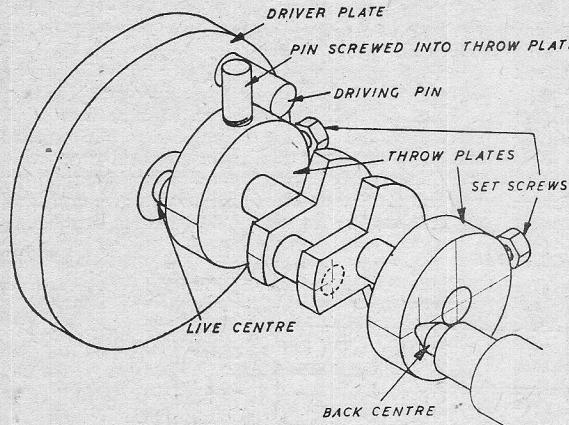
A crankshaft set up on crankpin centres by the aid of circular throw plates, showing a convenient method of driving
